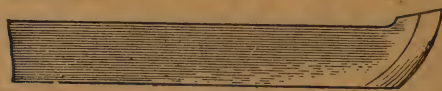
Diamond-pointed Tool Spoilt by Incorrect Grinding
